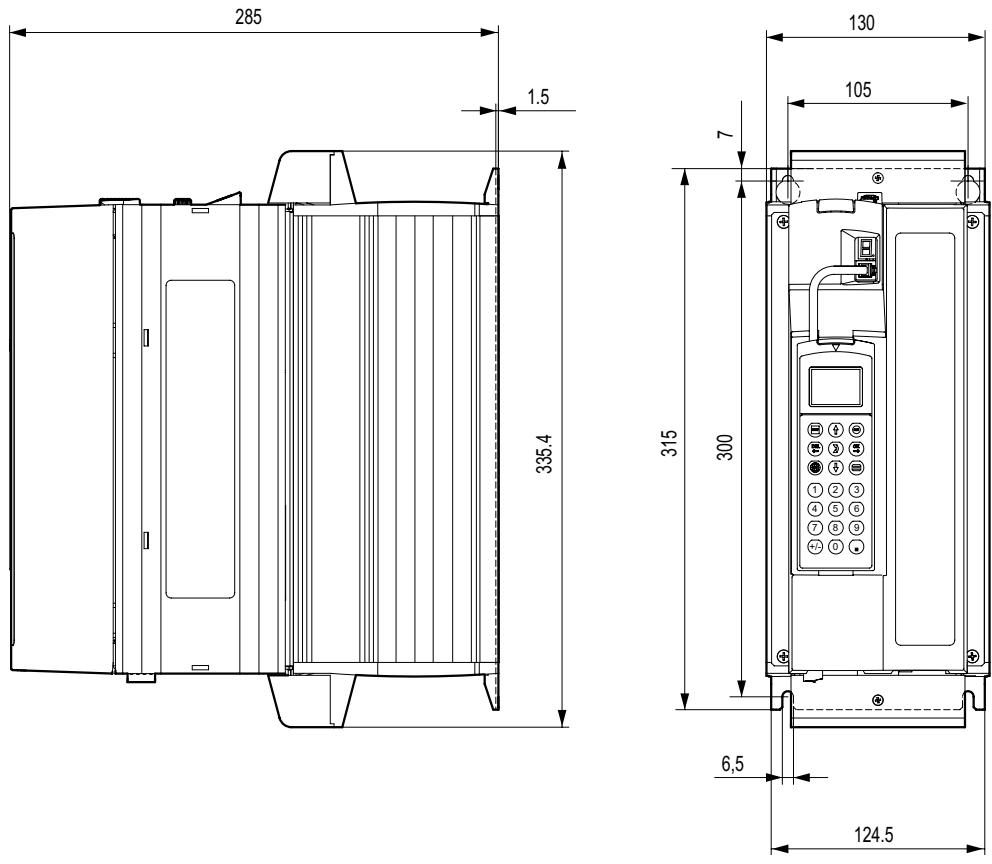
Dimension drawing for MDX61B size 2, dimensions in mm
